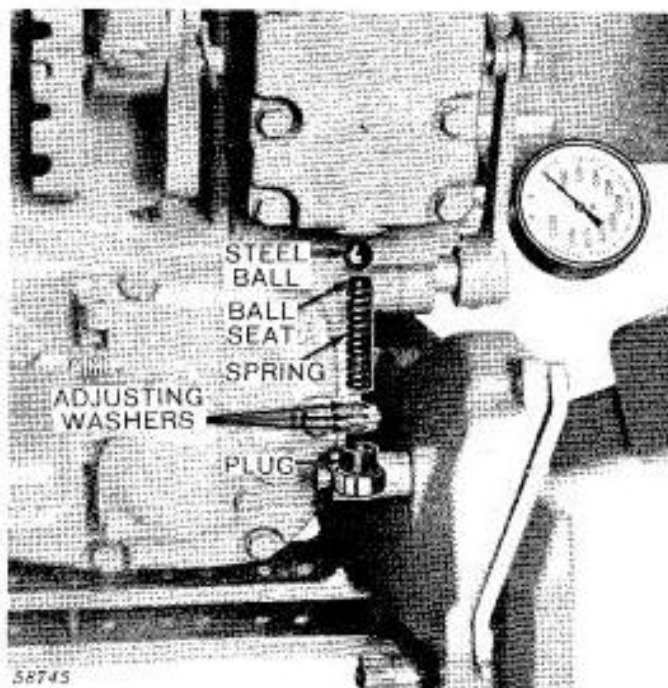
Checking Rockshaft Relief Pressure; Location of Adjusting Washers
